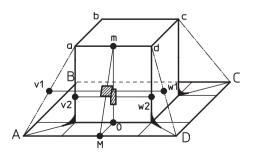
Schematic explanation of wrinkle formation on positive form
